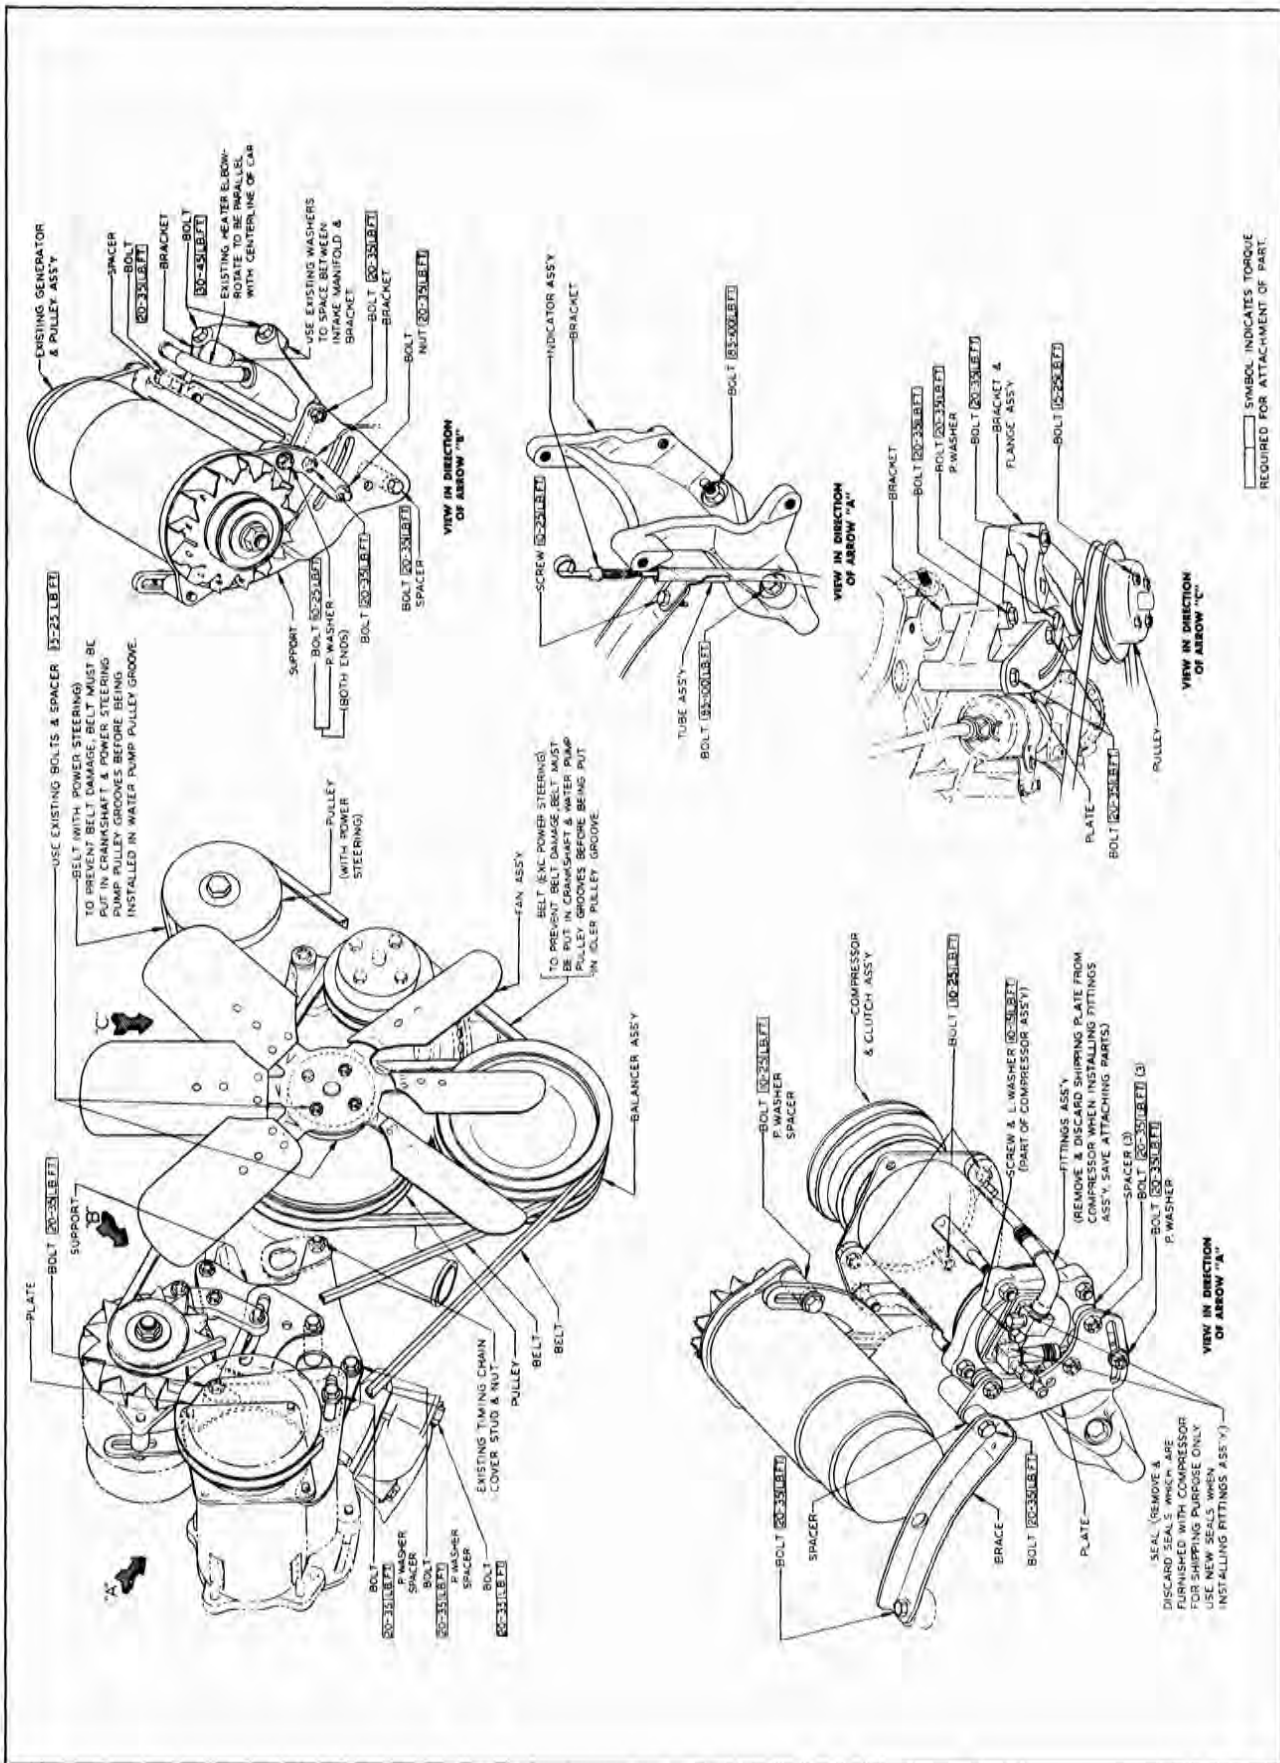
Reference Illustration—Pontiac Cool Pack Engine Compartment
